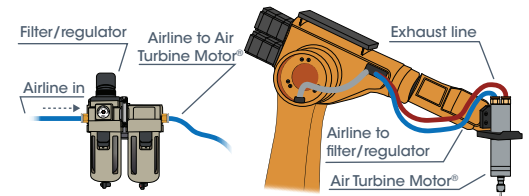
A clean airline from a filter/regulator to a mounted Air Turbine Motor® with exhaust hoses installed.
